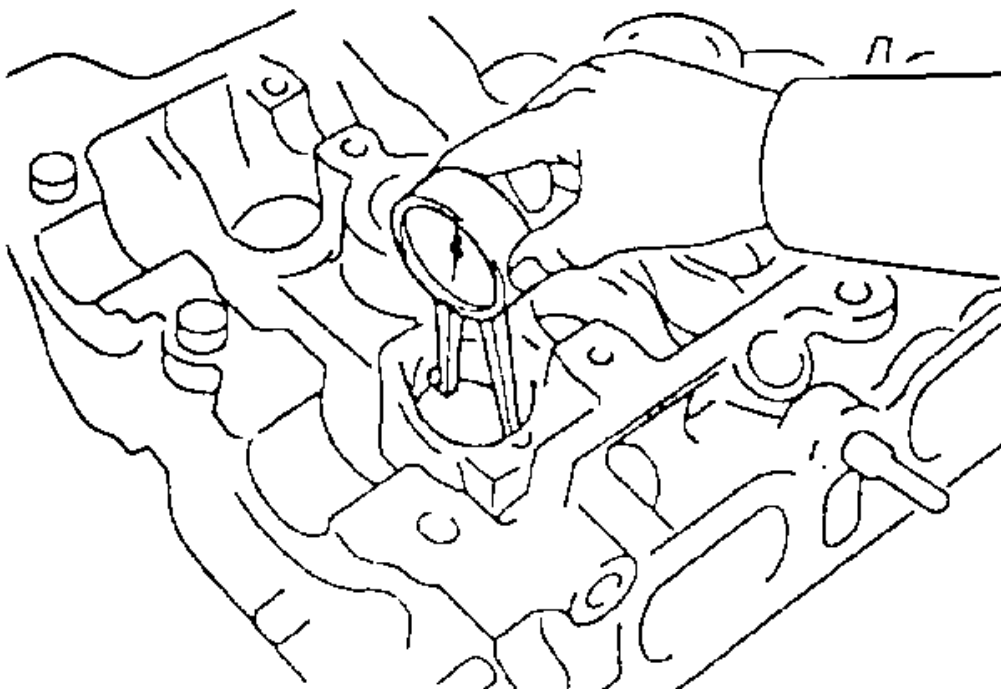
Measuring Clearance Of Valve Lifter Bores
